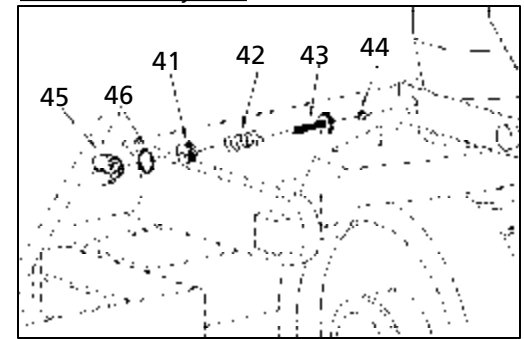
Hydraulic Pump, Wheel, and Axle Assembly
